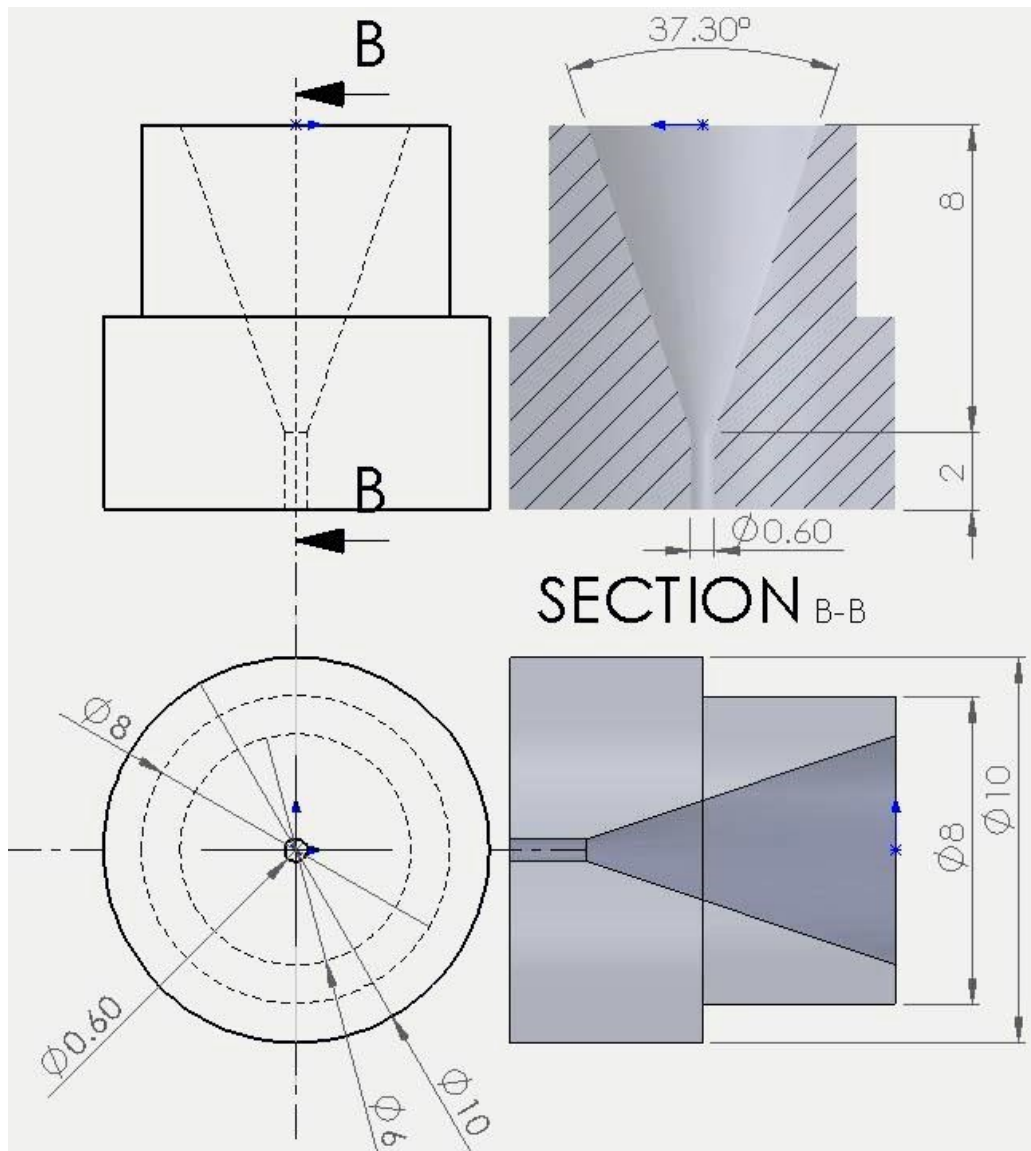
Engineering drawing of the 0.6 mm orifice diameter solid stream nozzle with a 2mm throat (section B-B).
